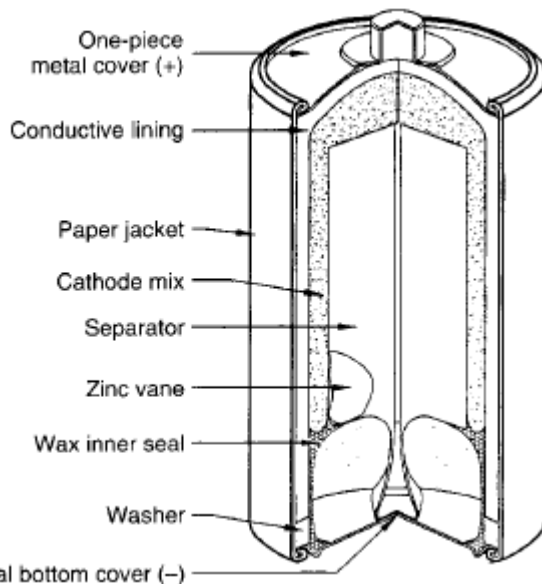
Typical cutaway view of cylindrical Leclanche ´ battery (“Eveready”) inside-out construction.
